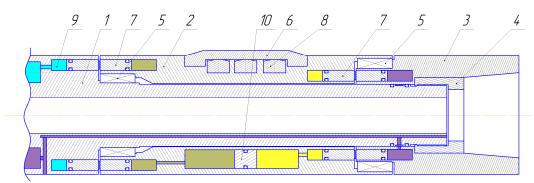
Mechanic power transmission to geostationary BU: 1 – Rotary element of RSS; 2 – Geostationary element of RSS; 3 – Adaptor coupling; 4 – Lock nut; 5 – Radial and thrust bearings; 6 – Bias element; 7 – Thrust bearings; 8 – Pistons; 9 – Actuator; 10 – Distributor piston.
